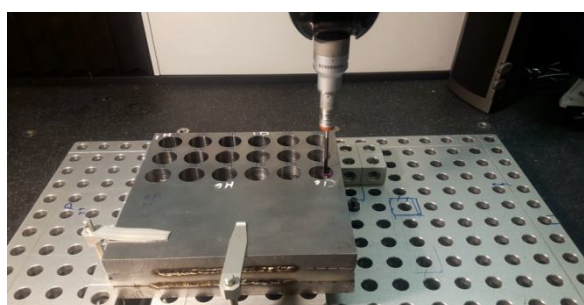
CMM probe during measuring of tolerances on machined holes
